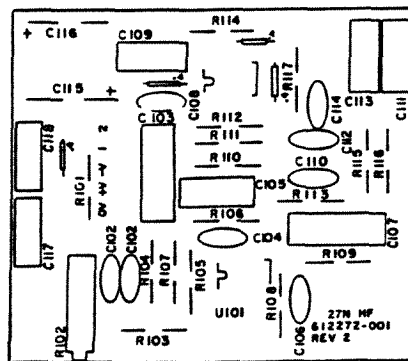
Typical Circuit Board Layout - Harmonic Filter Module
